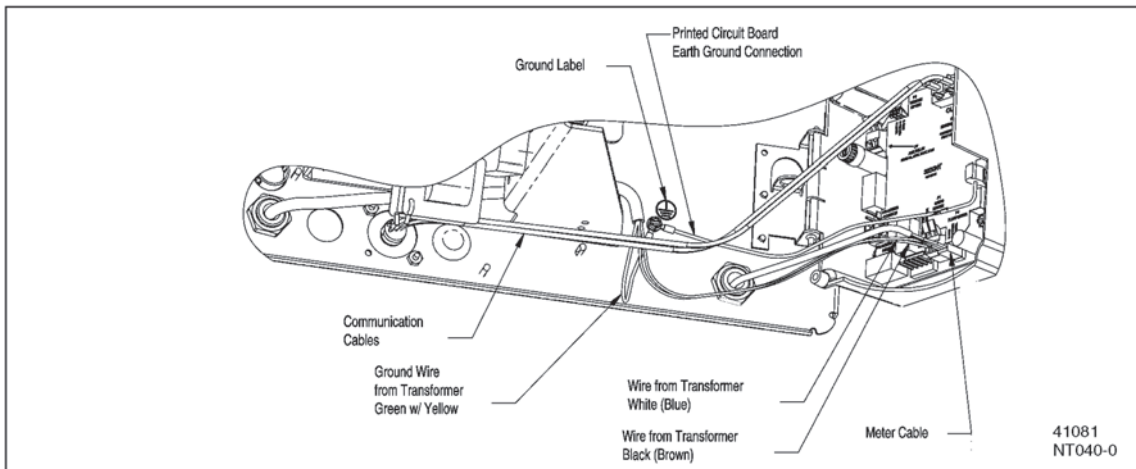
Installing Ground Wire on Transformer, 3150/3900 Valves
